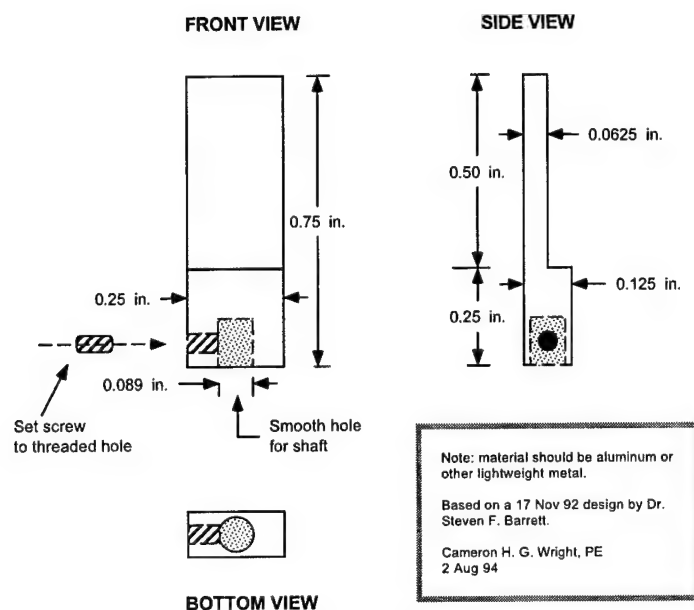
Mechanical drawing for mirror holders used on G124 galvanometers.
